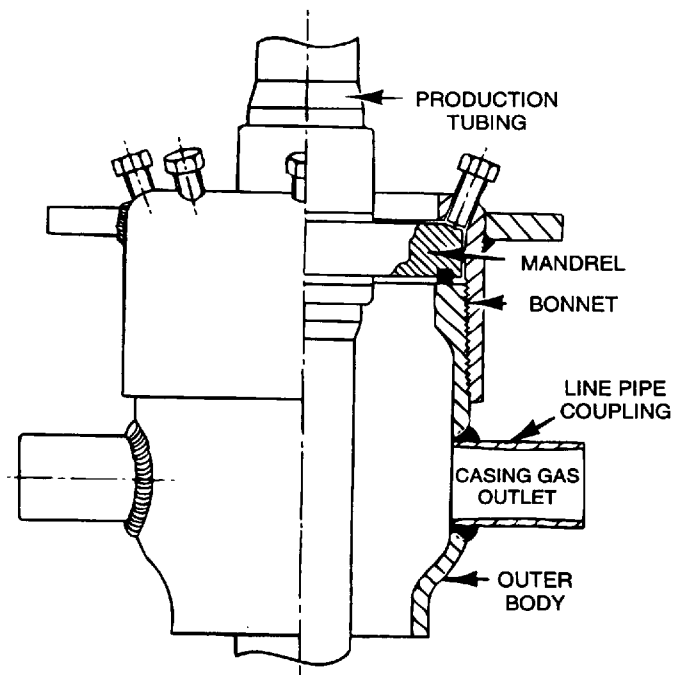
Low pressure tubing head. Sealing is provided by packing that is backed by a bonnet and cap screws.
